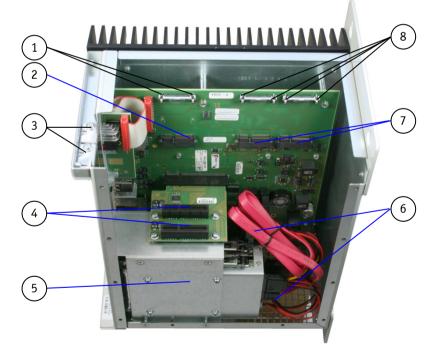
KBox C-101-2 without top and right side cover(shown with a PCIe riser card)
